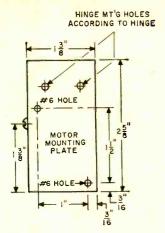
Mount motor to motor mounting plate. Then attach assembly to steering yoke by means of a hinge.
